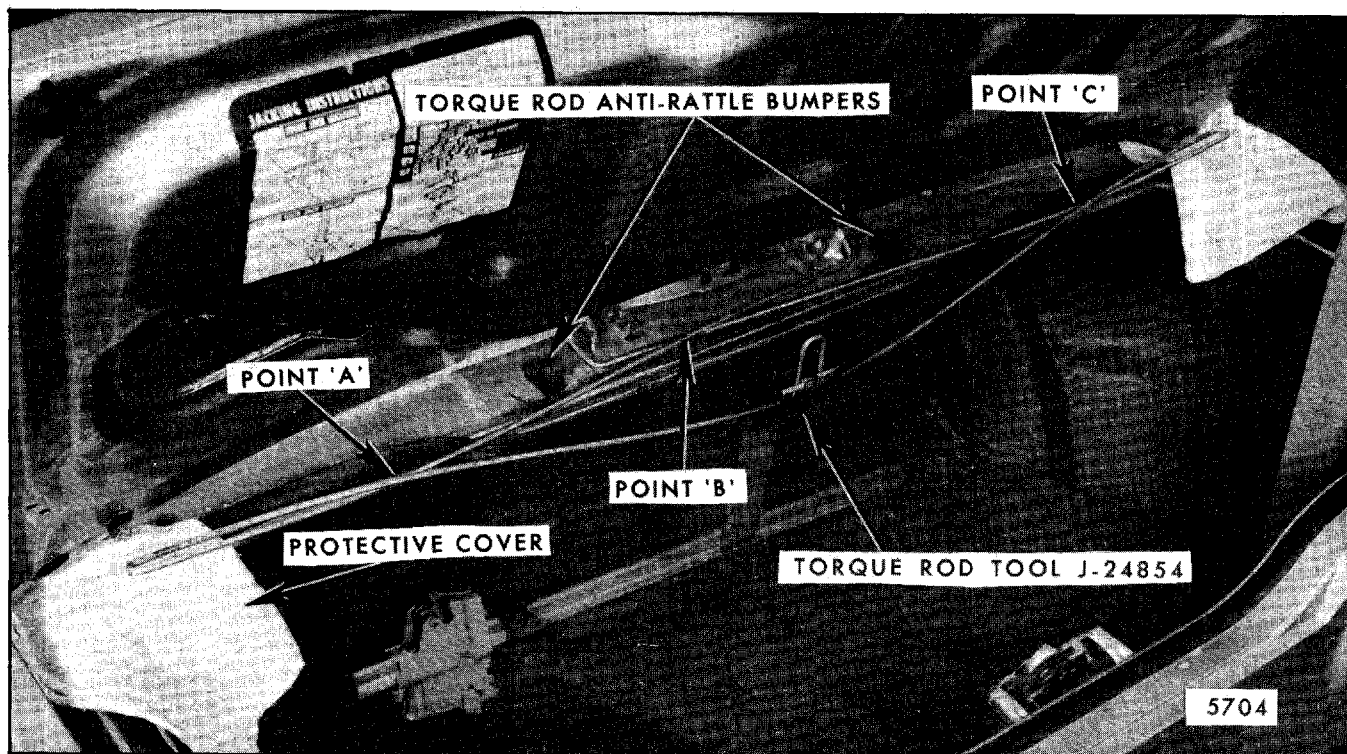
Rear Compartment Lid Removal Shown with Torque Rod Relieved - "11" Styles
